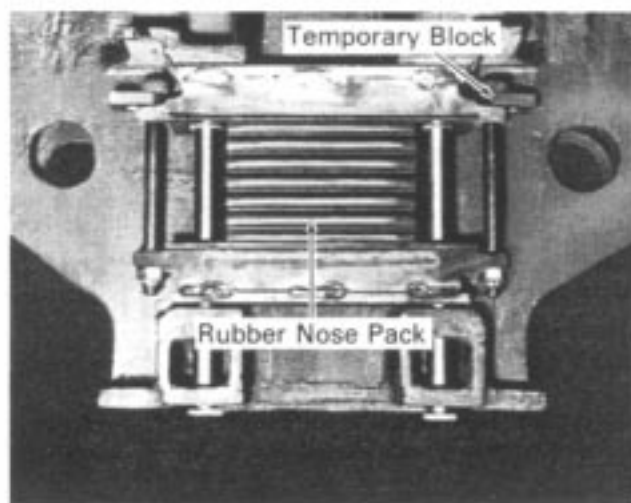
Installing Wheel, Axle, And Motor Assembly
